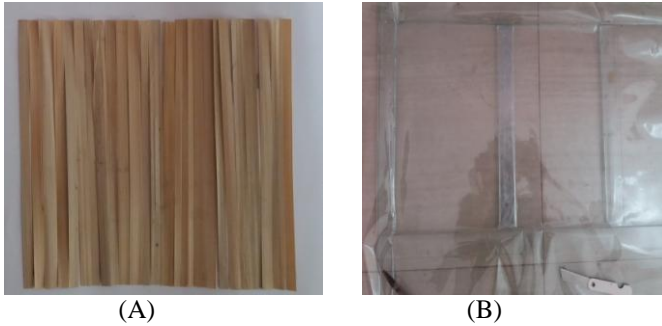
(a) arranged bamboo strips by teflon, (b). Mold made of glass plate
